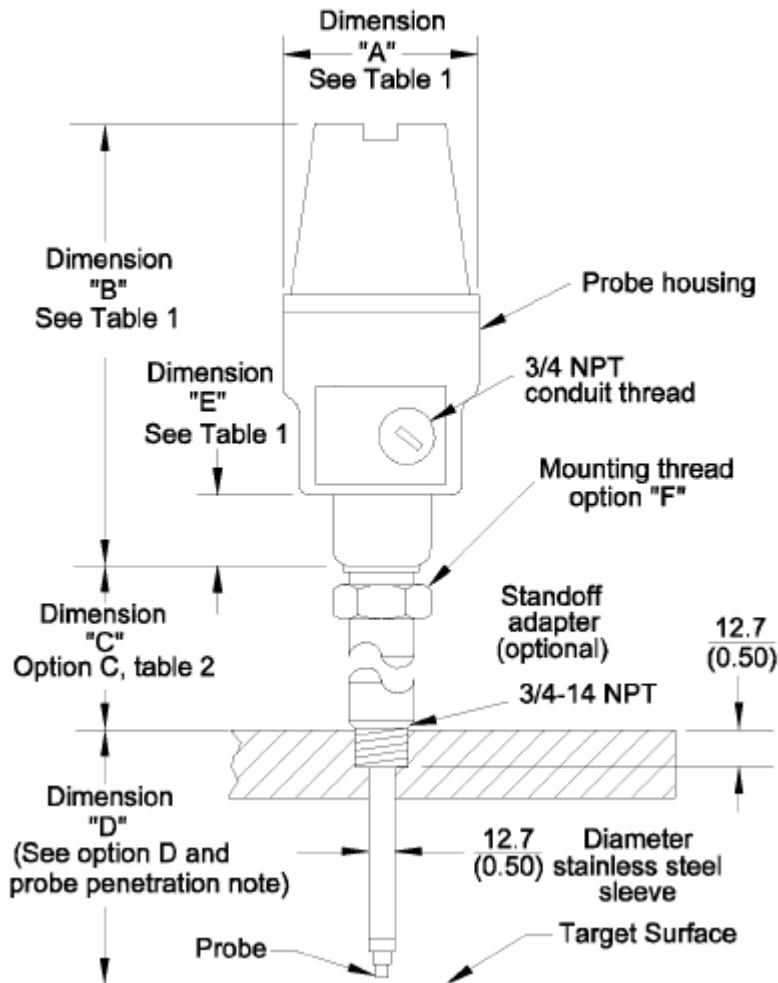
PROBE HOUSING ASSEMBLY
